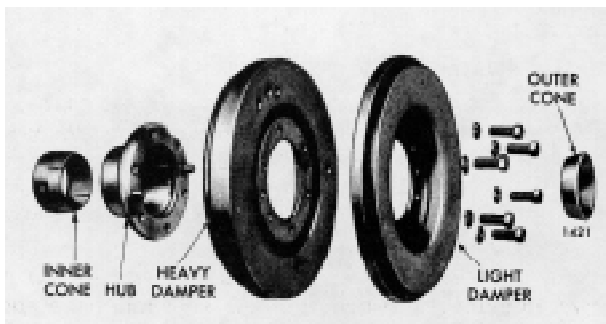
Double Vibration Damper Details and Relative Location of Parts
